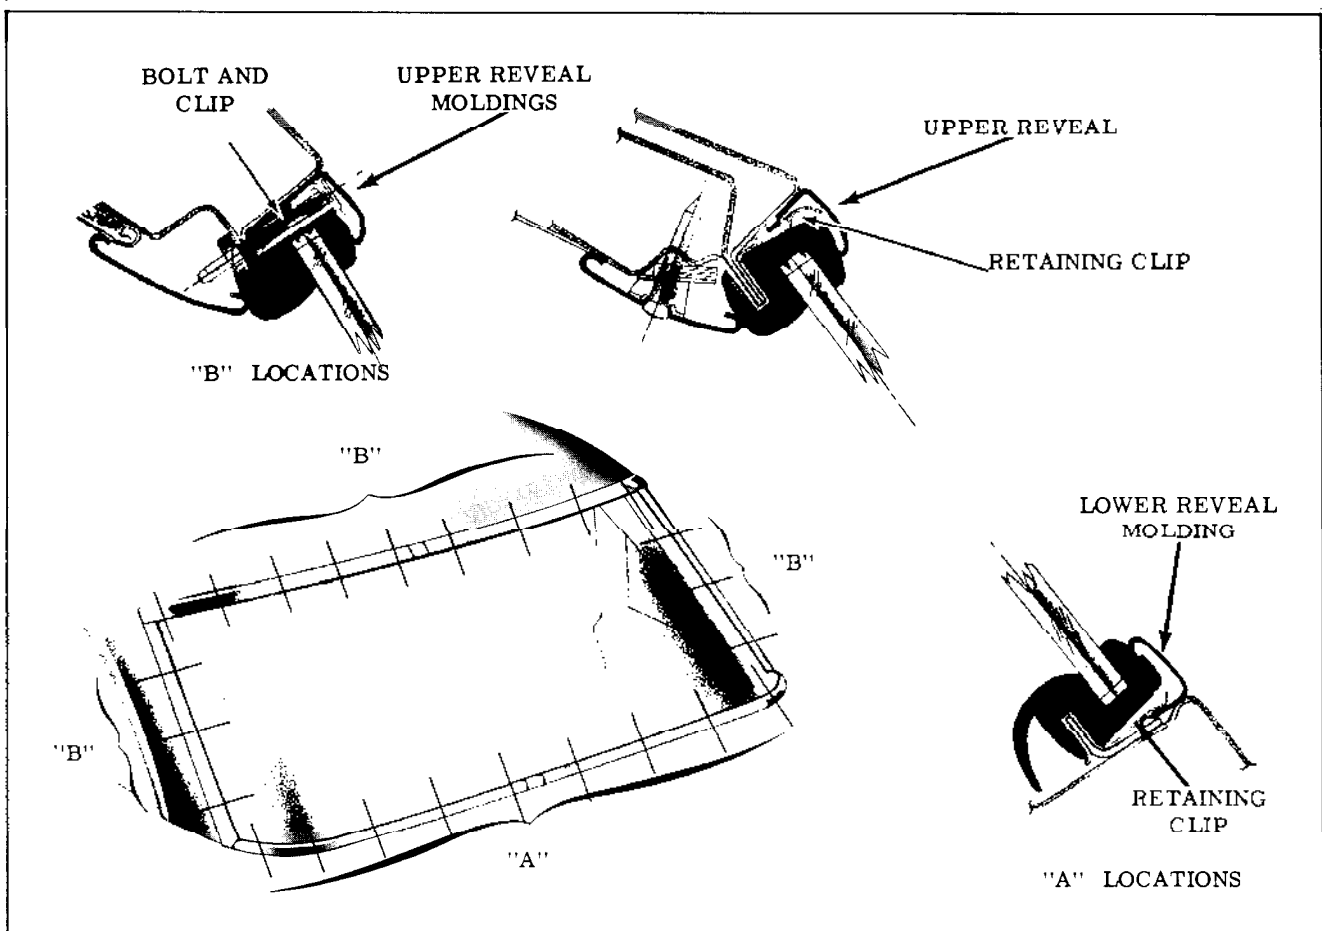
Back Window Reveal Moldings (19 Styles)
